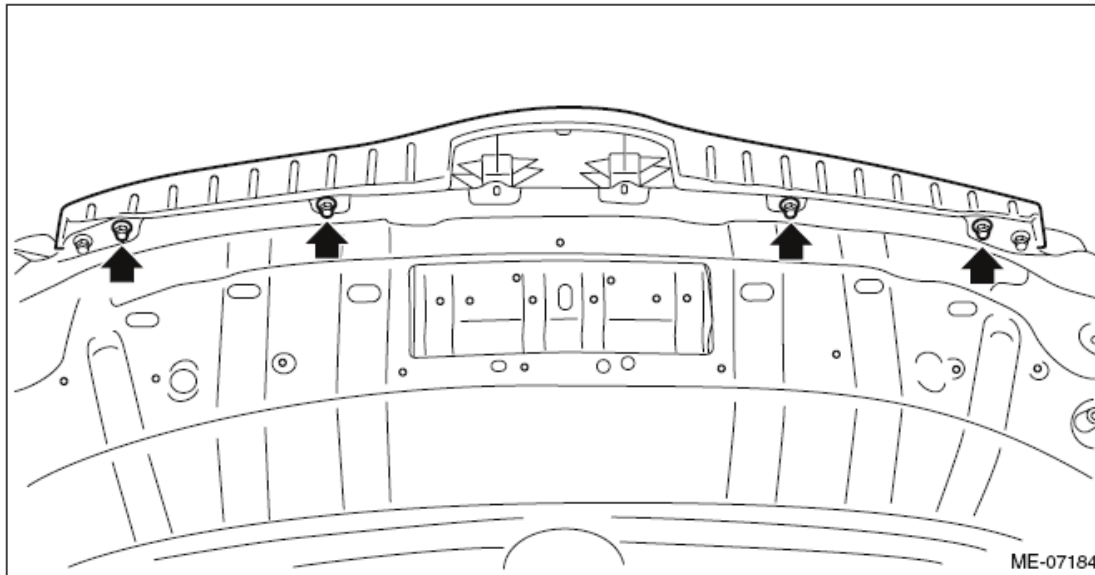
Removing Front Center Grille Assembly From Front Hood
